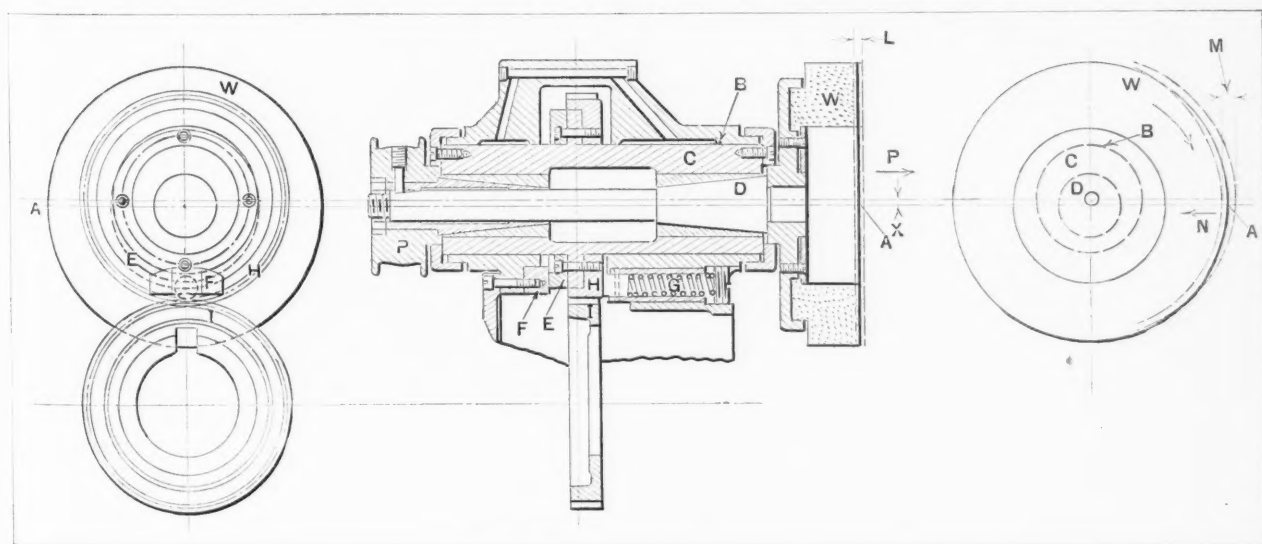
Mechanism Used in Drill Point Grinding Machine
